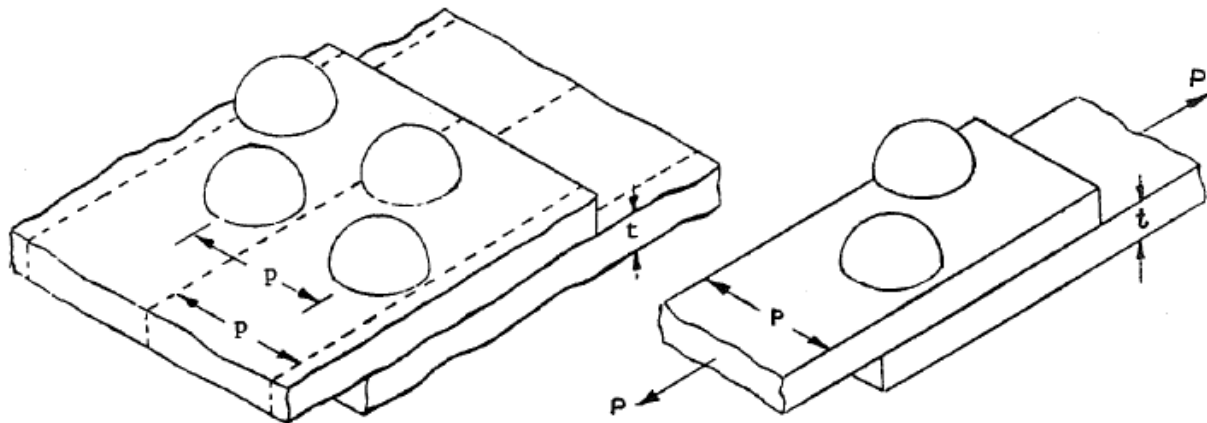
Double-riveted lap joint (zig-zag riveting)
